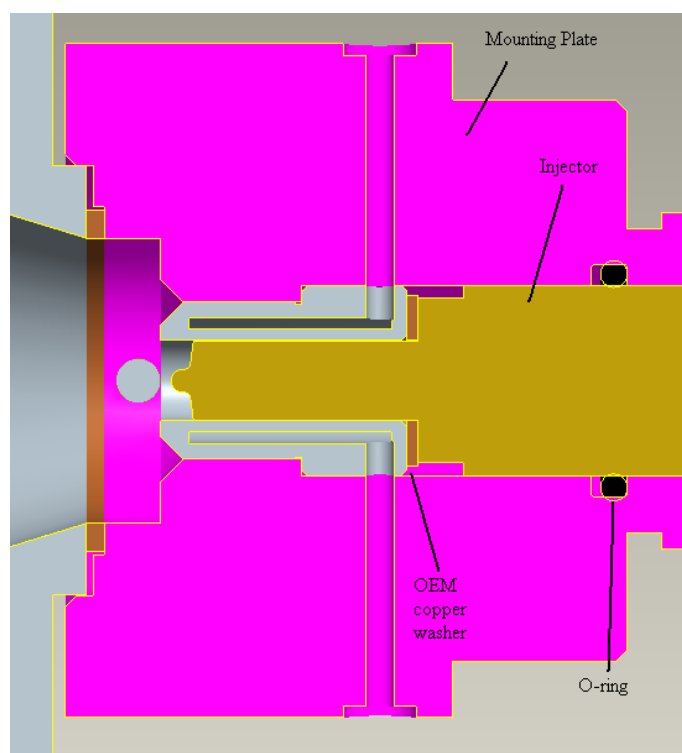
Final injector mounting configuration. The injector cooling jacket (Grey) was separately manufactured and then welded in place in the vee-shape produced by the chamfers.
